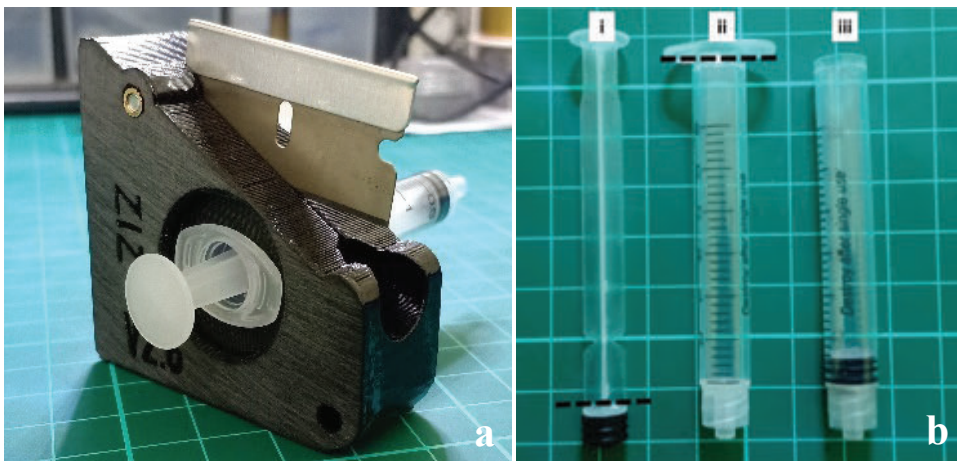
(a) Syringe cutting tool adaptor; (b) Preparation of the drug chamber barrel. i. Rubber plunger apparatus cut at dash line. ii. Trim off syringe flange. iii. Replace rubber plunger into syringe barrel.
